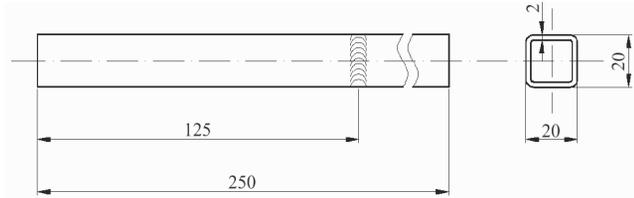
Test pieces which model repaired parts with TIG welding
